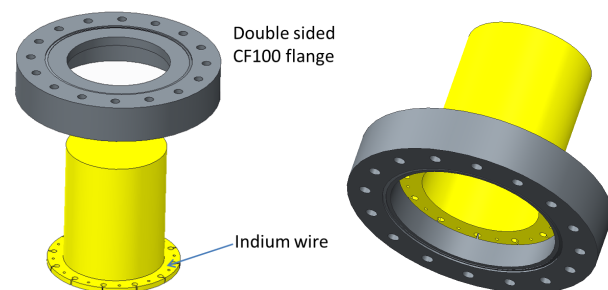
CAD sketch of the newly developed QPR sample chamber. Exploded view (left) and assembly ready for mounting into the QPR (right).
